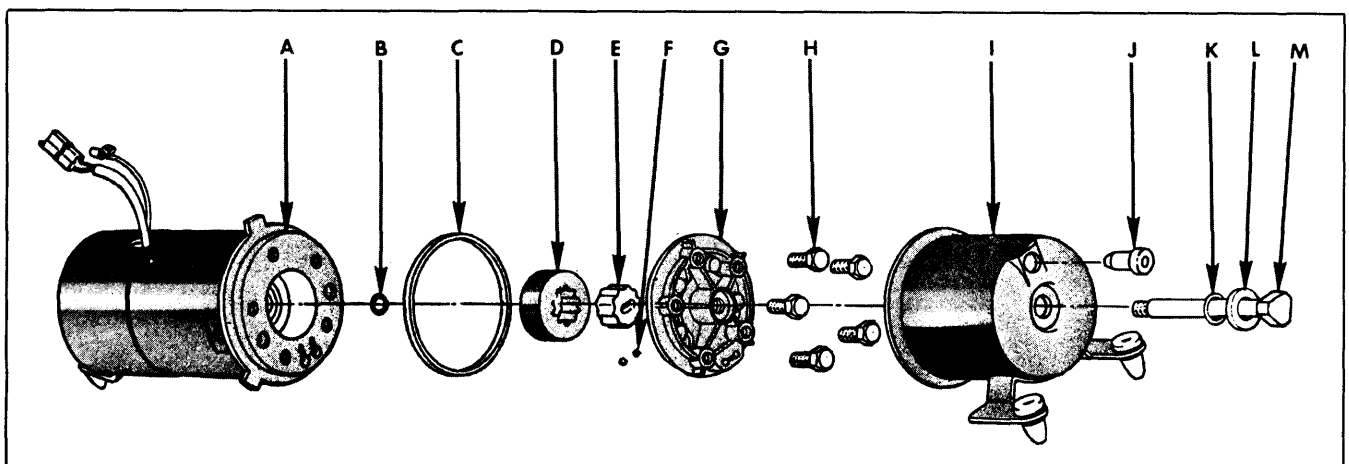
Motor and Pump Components - All 67 Styles Except "Z" Body
